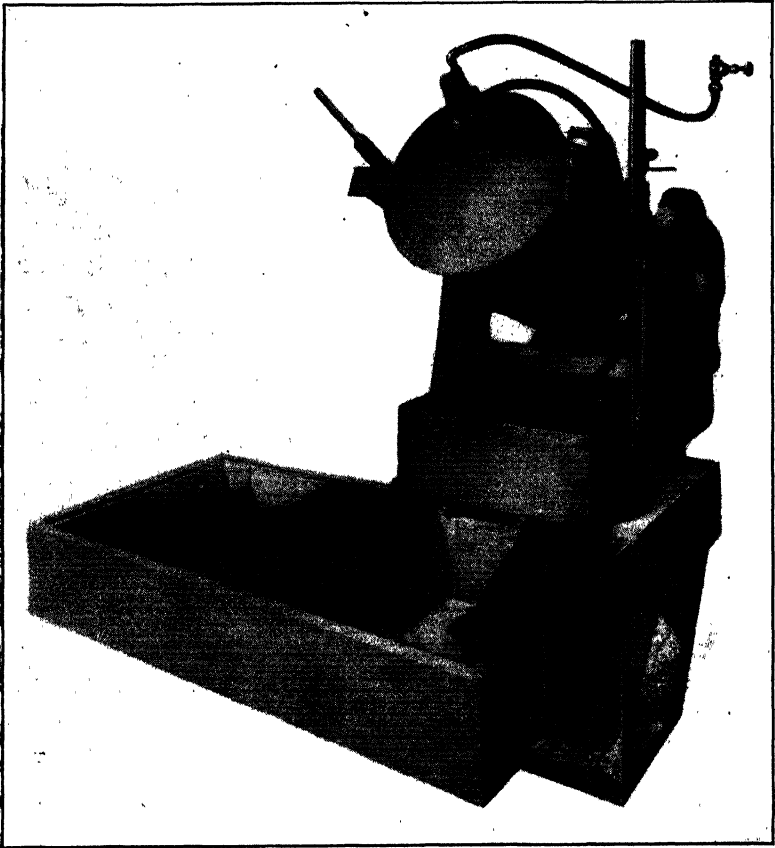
Cut-away view of a typical Hydro-Blast Barrel for cleaning castings. (Courtesy of Whiting Corp., Harvey, Ill.)
